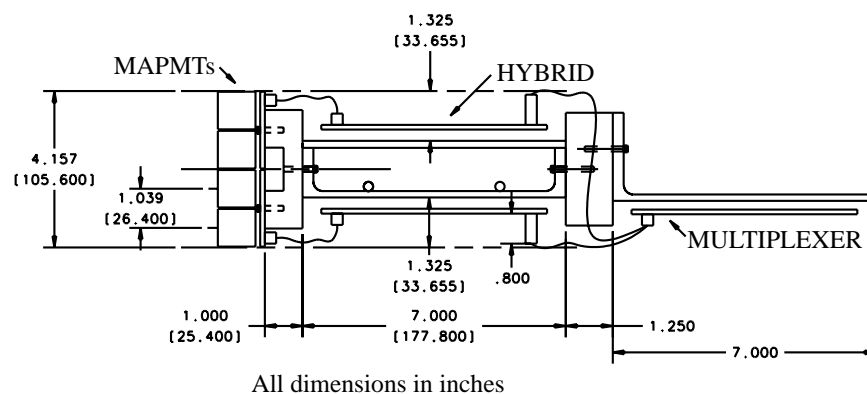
Drawing of prototype mounting scheme of MAPMTs.
